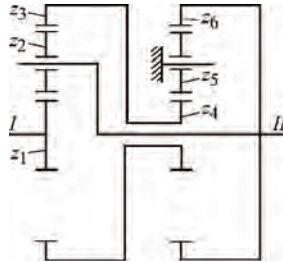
Kinematic scheme of coaxial differential - planetary reduction gear (turboprop engine): I \square from the engine; II \square to the rotor
